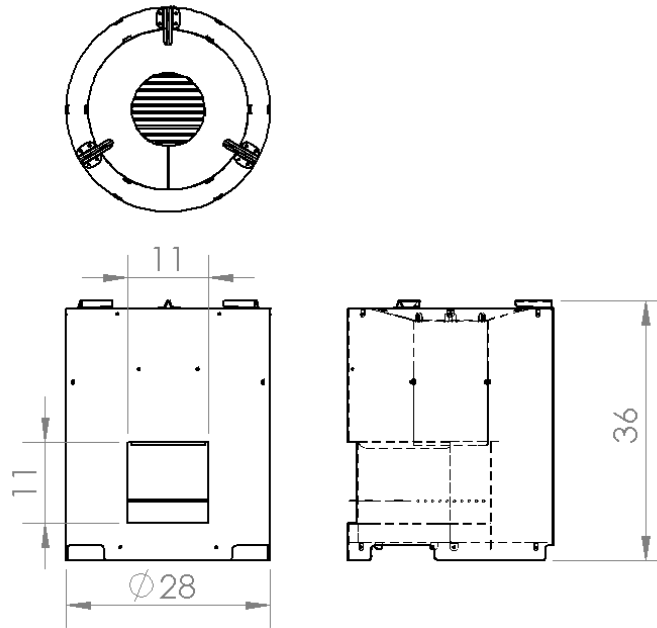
Dimensioned drawing of BURN Design Lab prototype cookstove.
